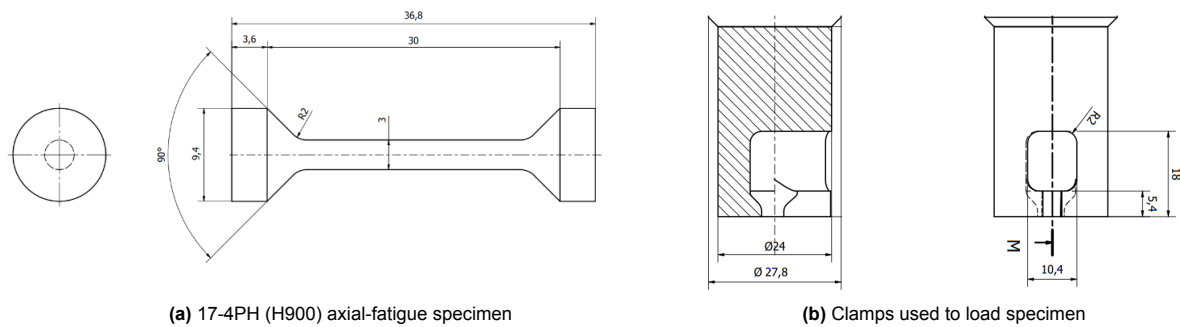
Clamp and specimen technical drawings [received from laboratory staff]
